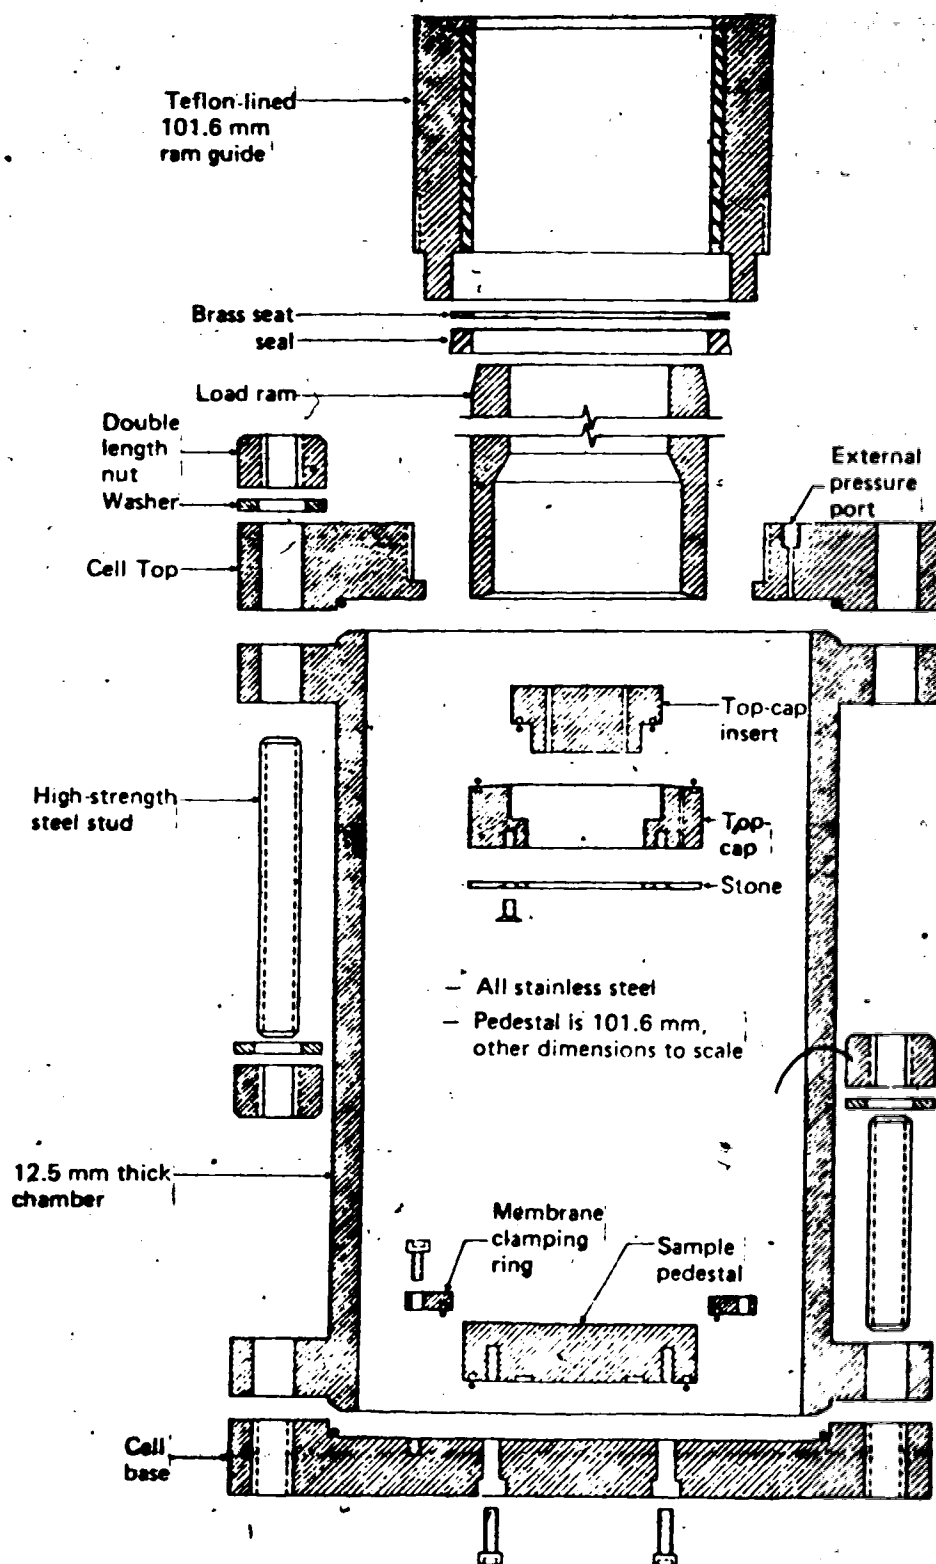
Exploded Sectional View of the High Pressure Triaxial Cell.
